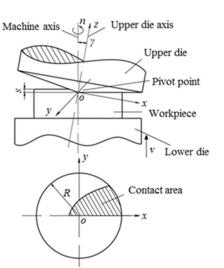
Schematic diagram of rotary forging of a cylindrical workpiece
